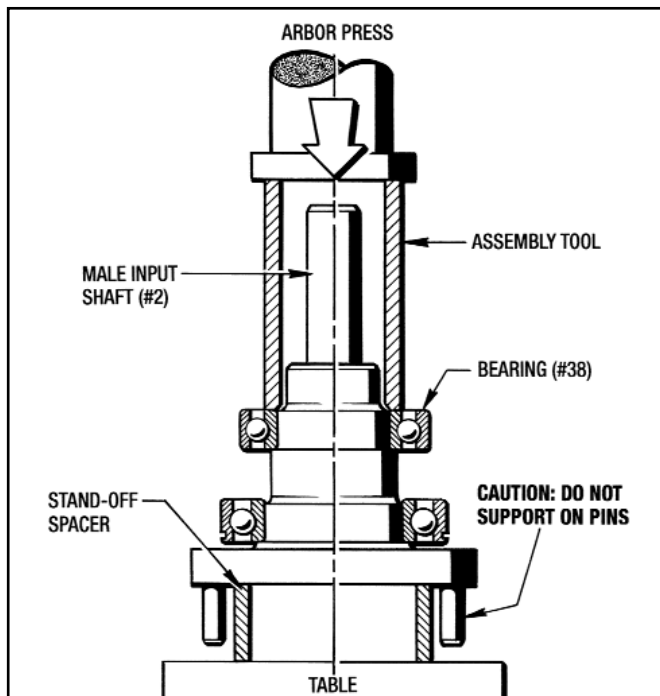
Installing Outboard Bearing (#38) on Male Shaft
